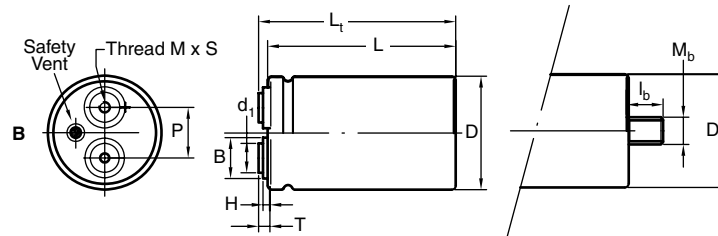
B: High current M6 disc: screw terminal (ST) and screw terminal bolt nut (STB)
